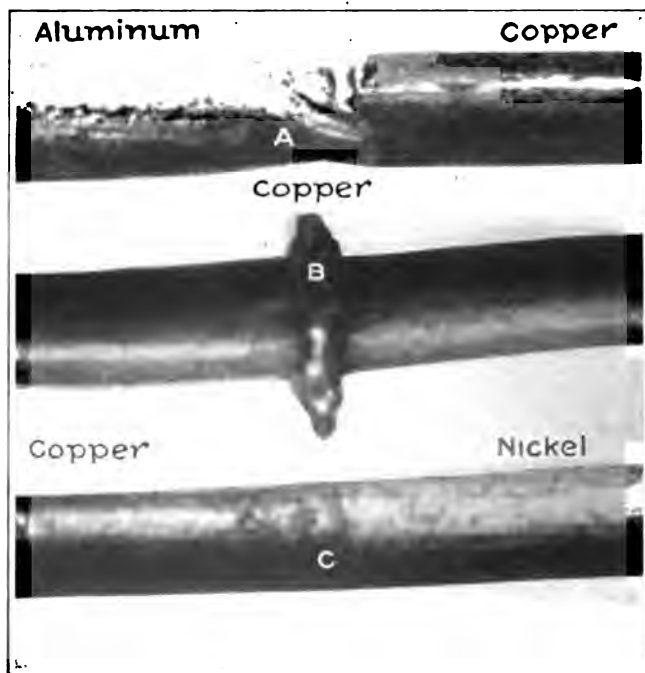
Nickel, Copper, and Aluminum Wires united by Percussive Electric Welding, showing Condition of Metal at Welded Joint
